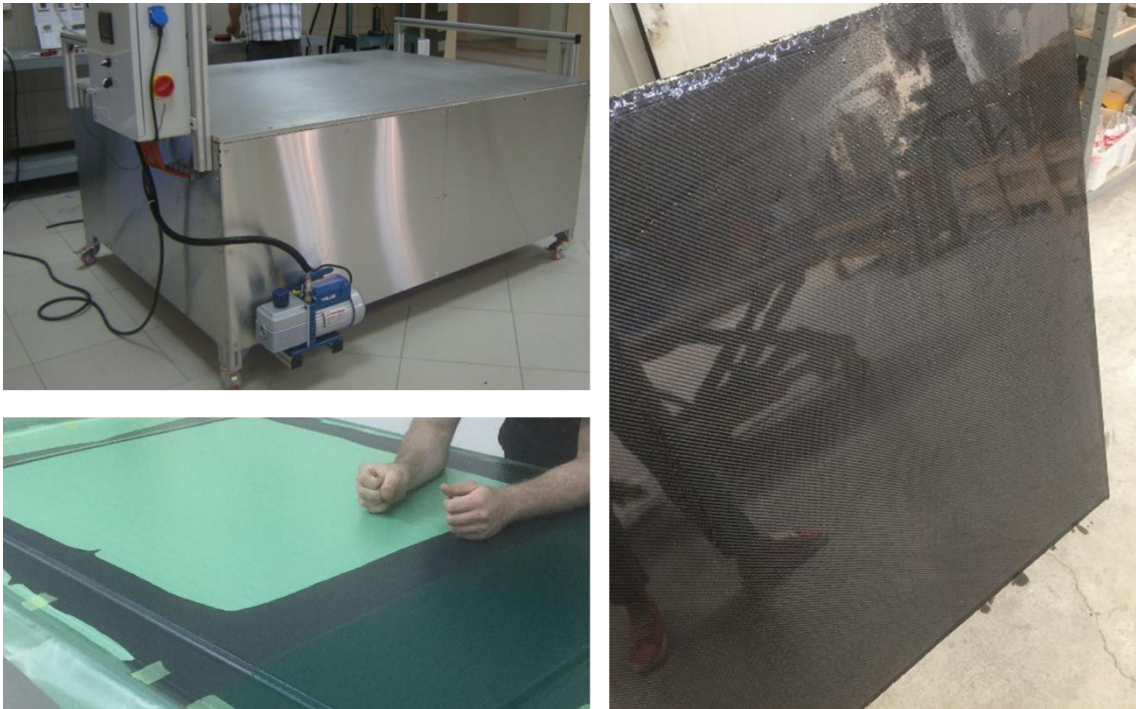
Face sheets manufacturing through vacuum infusion technique
